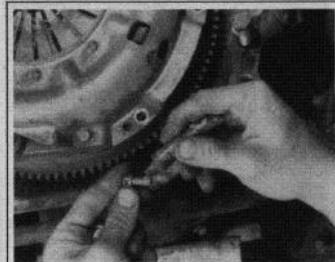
Use the clutch alignment tool to align the clutch disc during assembly
